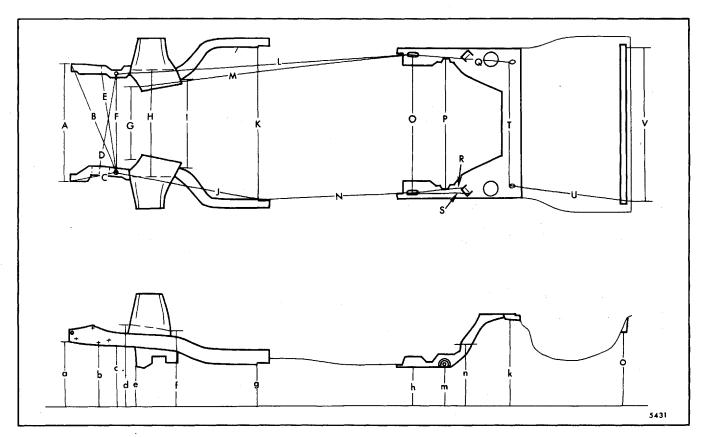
Horizontal and Vertical Checking Dimensions - H-15-77 Styles
